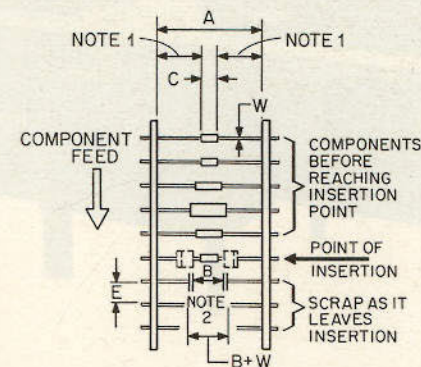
Typical component specifications for lead taping prior to machine loading.
